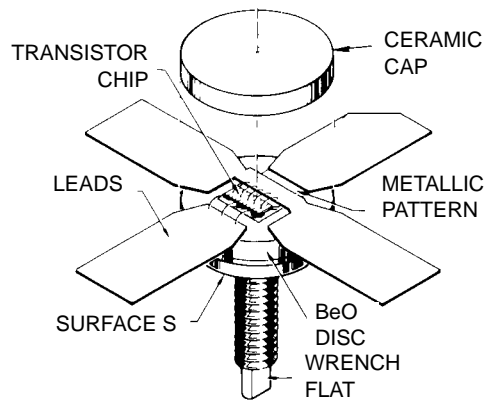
Component Parts of a Stud Mount Stripline Package. Flange Mounted Packages are Similarly Constructed
